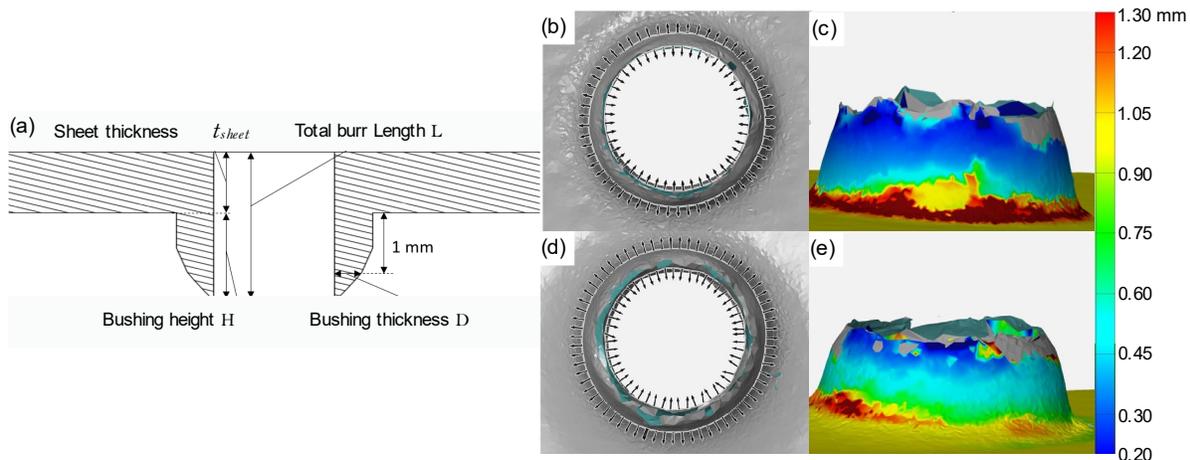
(a) Dimensions nomenclature for friction drilling in this paper, (b & c) Thickness measurement of cold friction drilled hole, (d & e) Thickness measurement of pre-heated friction drilled hole.
